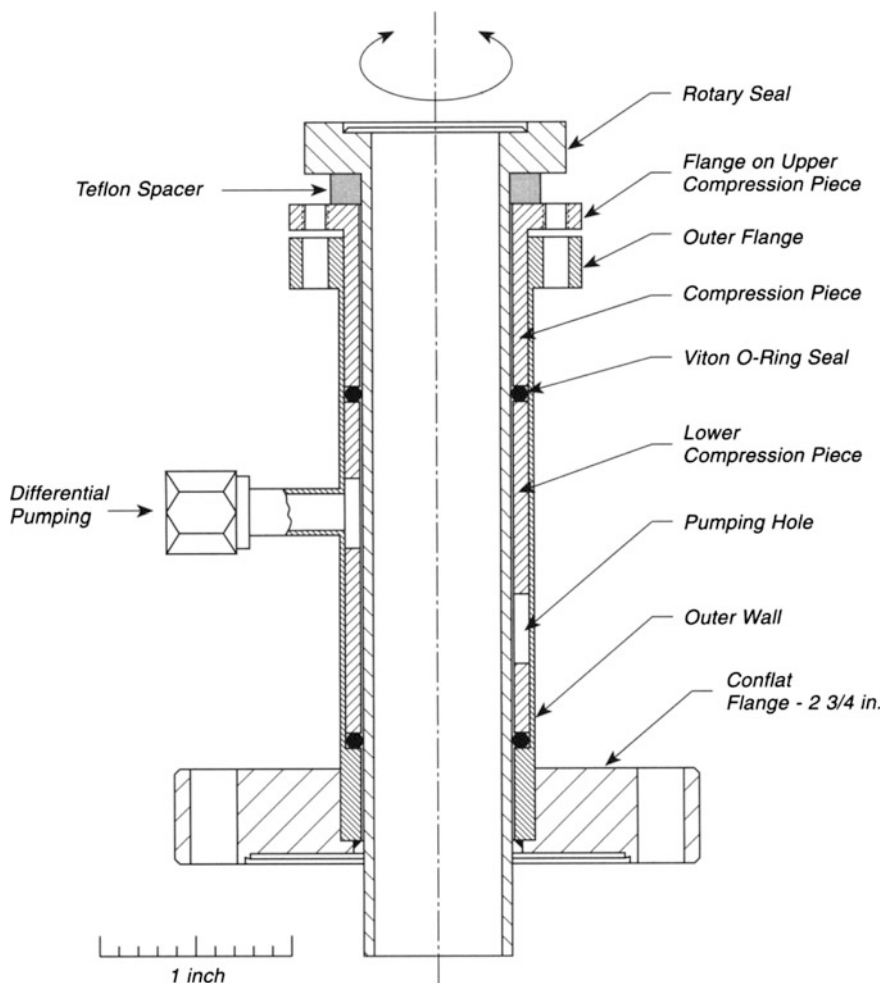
Differentially pumped rotary seal—Viton O-ring
